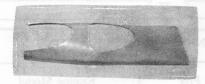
10X magnified view showing appearance of area cracked due to abnormal loading imposed on the propeller flange during periods of unauthorized maneuvers.
